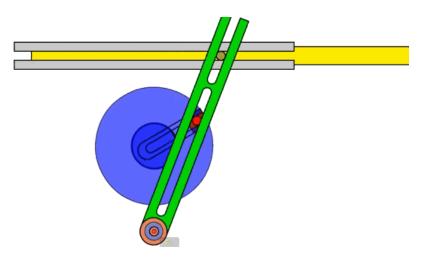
QRR mechanism Source : https://skill-lync.com/
